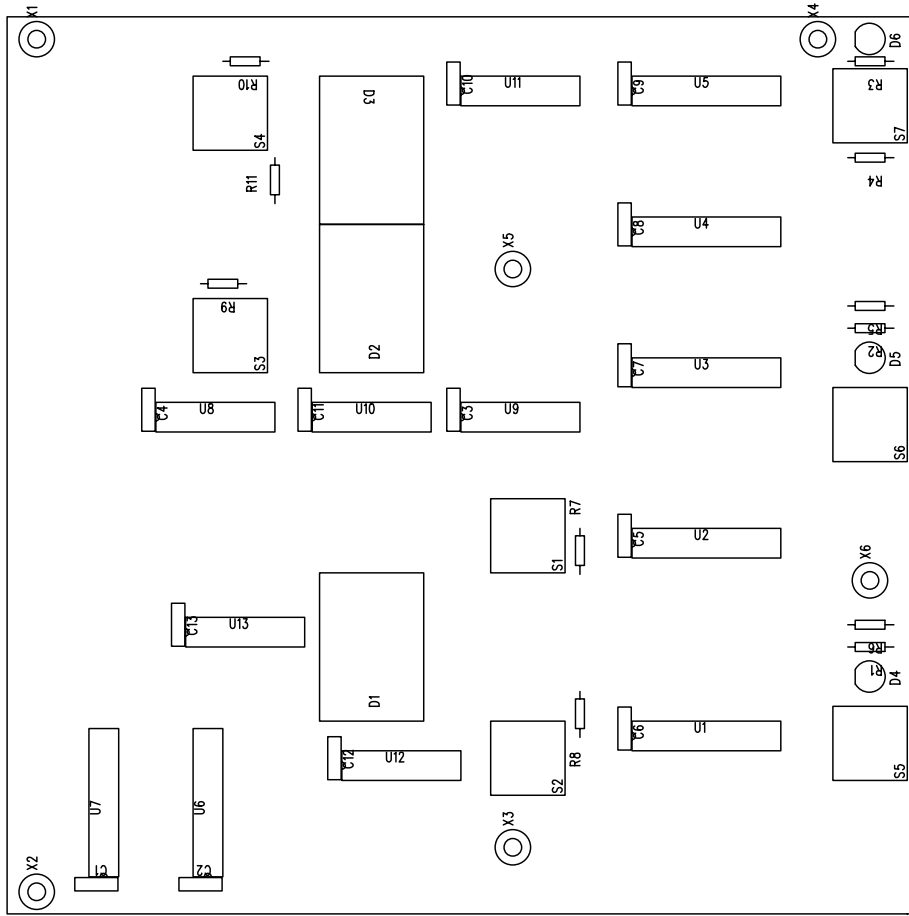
Transport control module PCB, silkscreen/assembly drawing.
